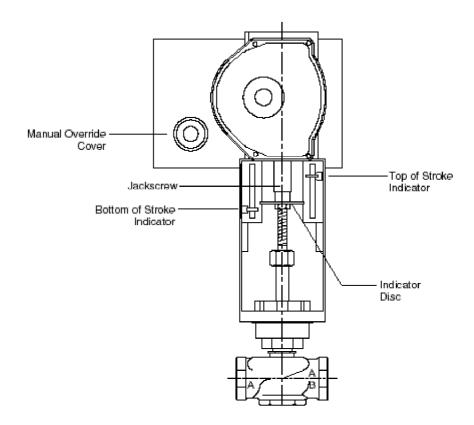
MS-79X3 and VB-73X3 Valve Assembly.
